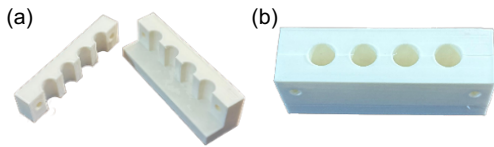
3D printed mold for the manufacture of cement-based samples: (a) Parts of mold, (b) 3D mold.
